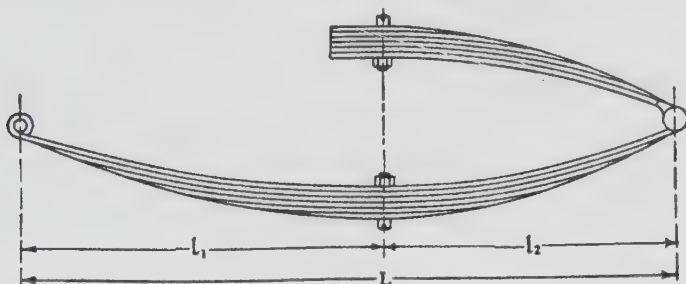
ECCENTRATED THREE-QUARTER ELLIPTIC SPRING.
